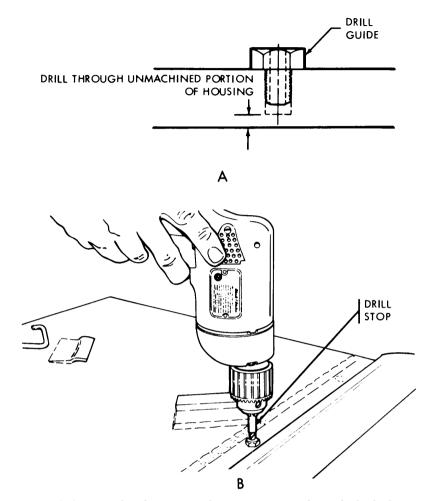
Top loading air cleaner access door bolt holes rework.
